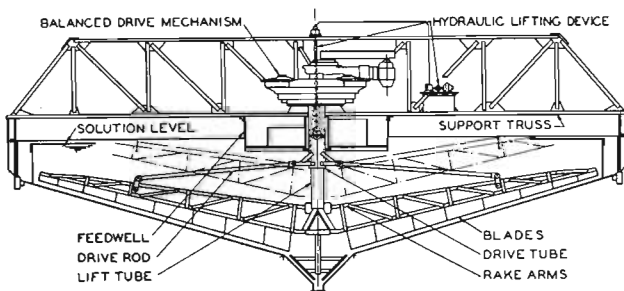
Illustrative sectional elevation of hydroseparator utilizing interrupted rake blades.
